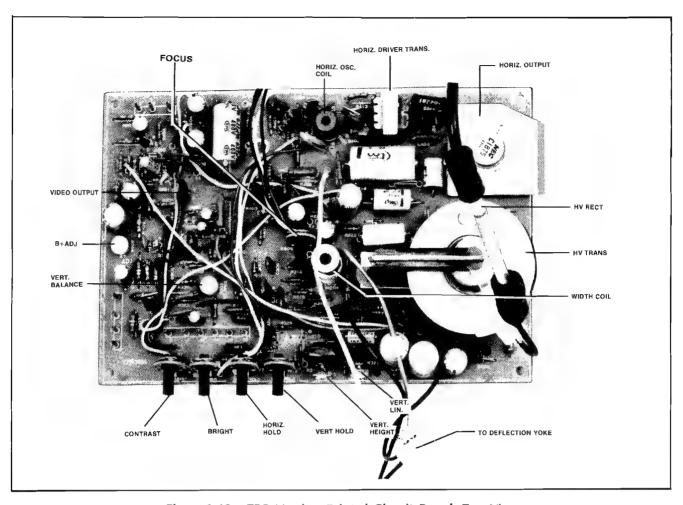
TEC Monitor Printed Circuit Board, Top View
